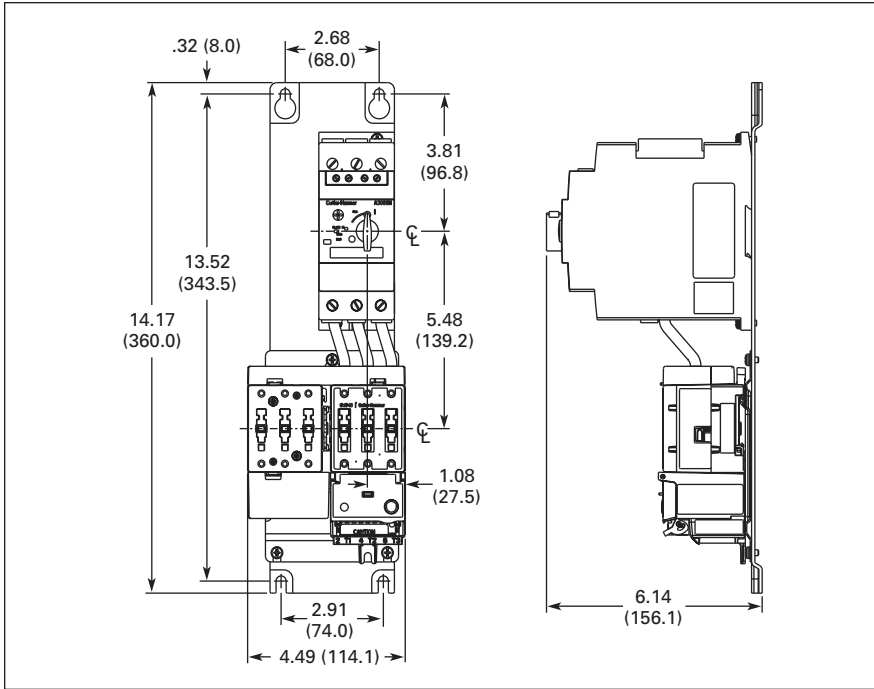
Reversing Combination Motor Controller N358 (A308 MMP + N511C [Size 1] Contactor) — Approximate Dimensions in Inches (mm)
